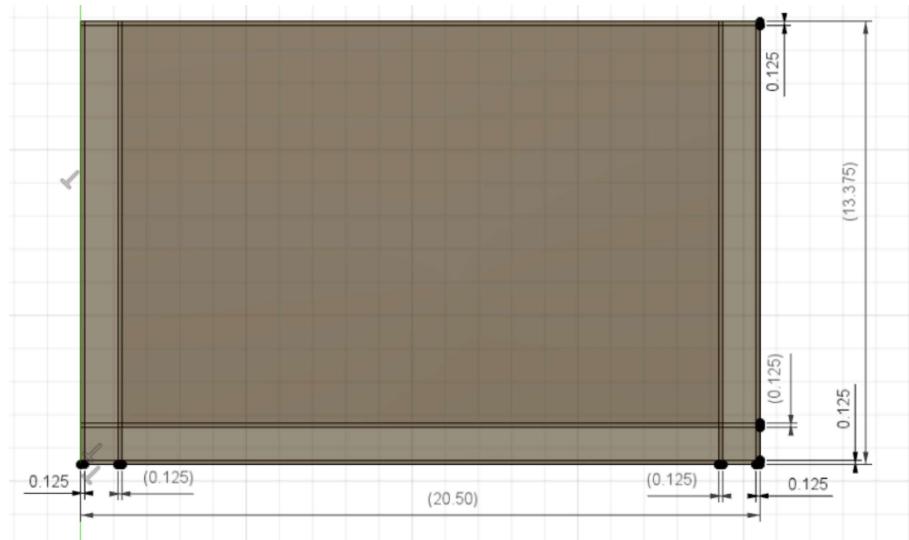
Bottom View Dimensions of Reflow Oven. (Units: Inches)
